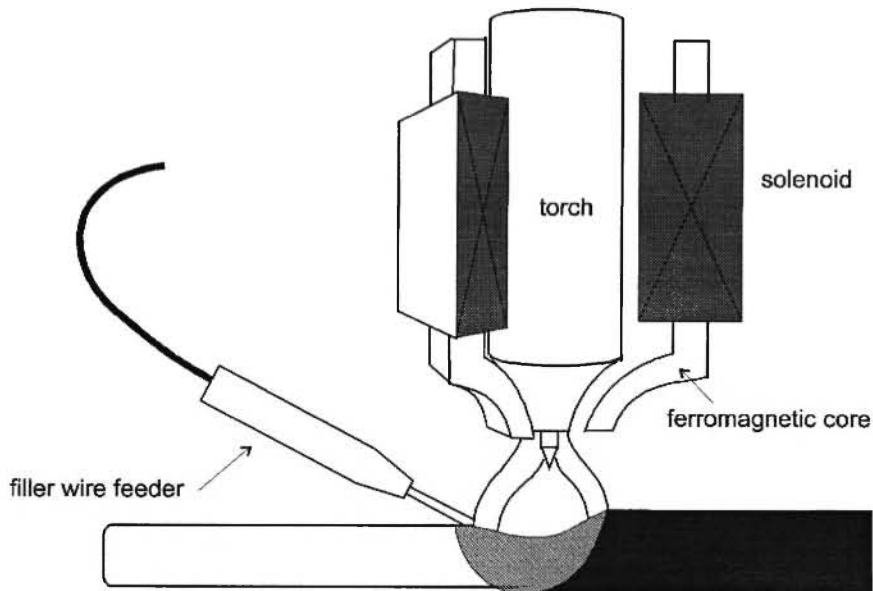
Experimental set-up with three electromagnets surrounding the welding torch. Two electromagnets are visible, the third one is located behind the torch.
